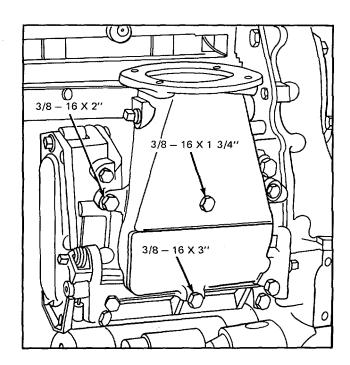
Location of Air Shutdown Housing Mounting Bolts (In-Line Engines)
